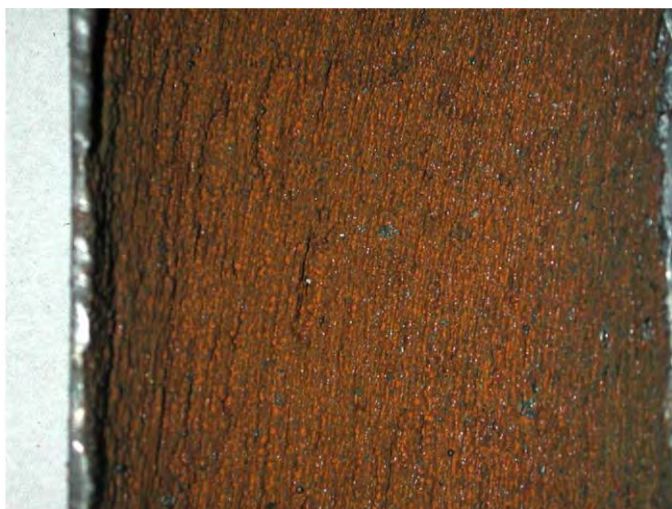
Galvanic corrosion of coated carbon steel tube sheet because of high ratio between cathode (Admiralty brass tubes) and anode area (carbon steel tube sheet coated with epoxy). Gray – failed epoxy coating; yellow – rusted tube sheet.
